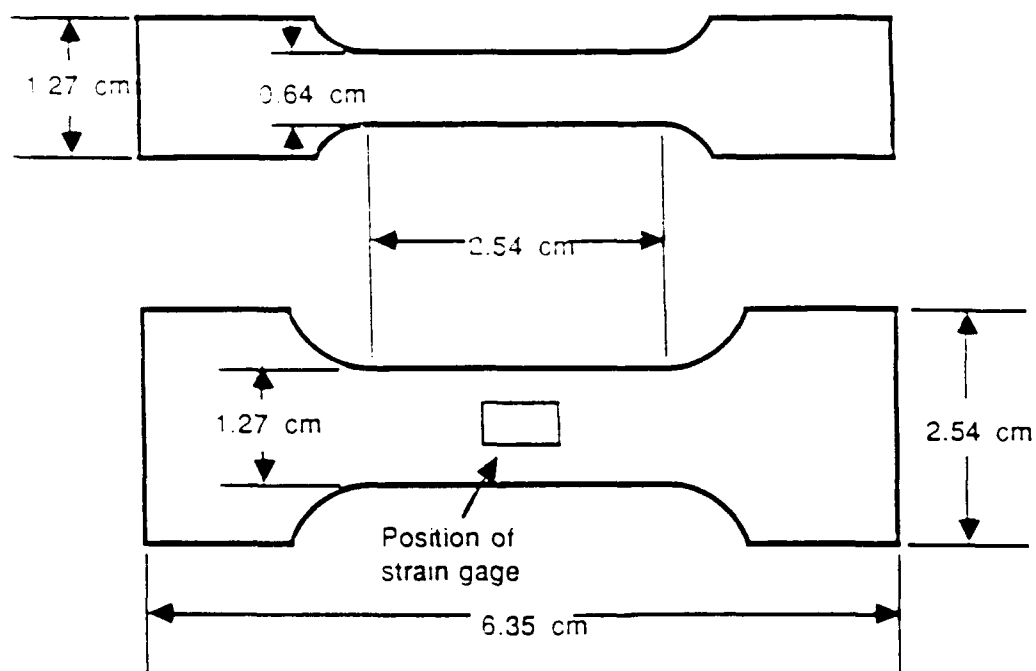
Two types of tensile test specimens used for the measurement of a.) tensile strength and b.) stiffness and fracture strain of fiber reinforced castings.
